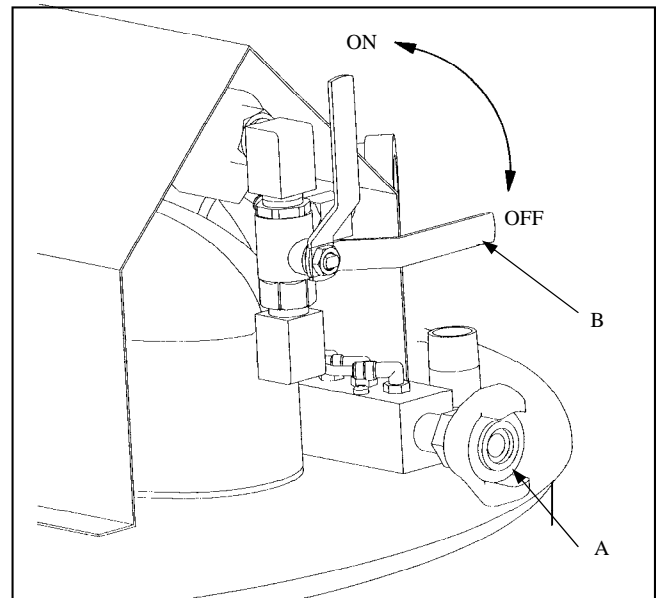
Supply Air Connector and Tank Vacuum Valve
